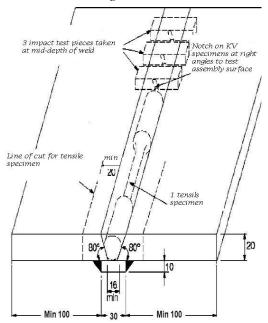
Deposited metal test assembly for testing of electrodes for manual
